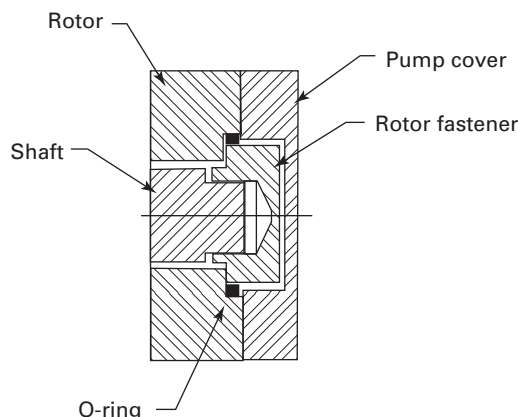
Rotary Lobe Pump Rotor Attachment
